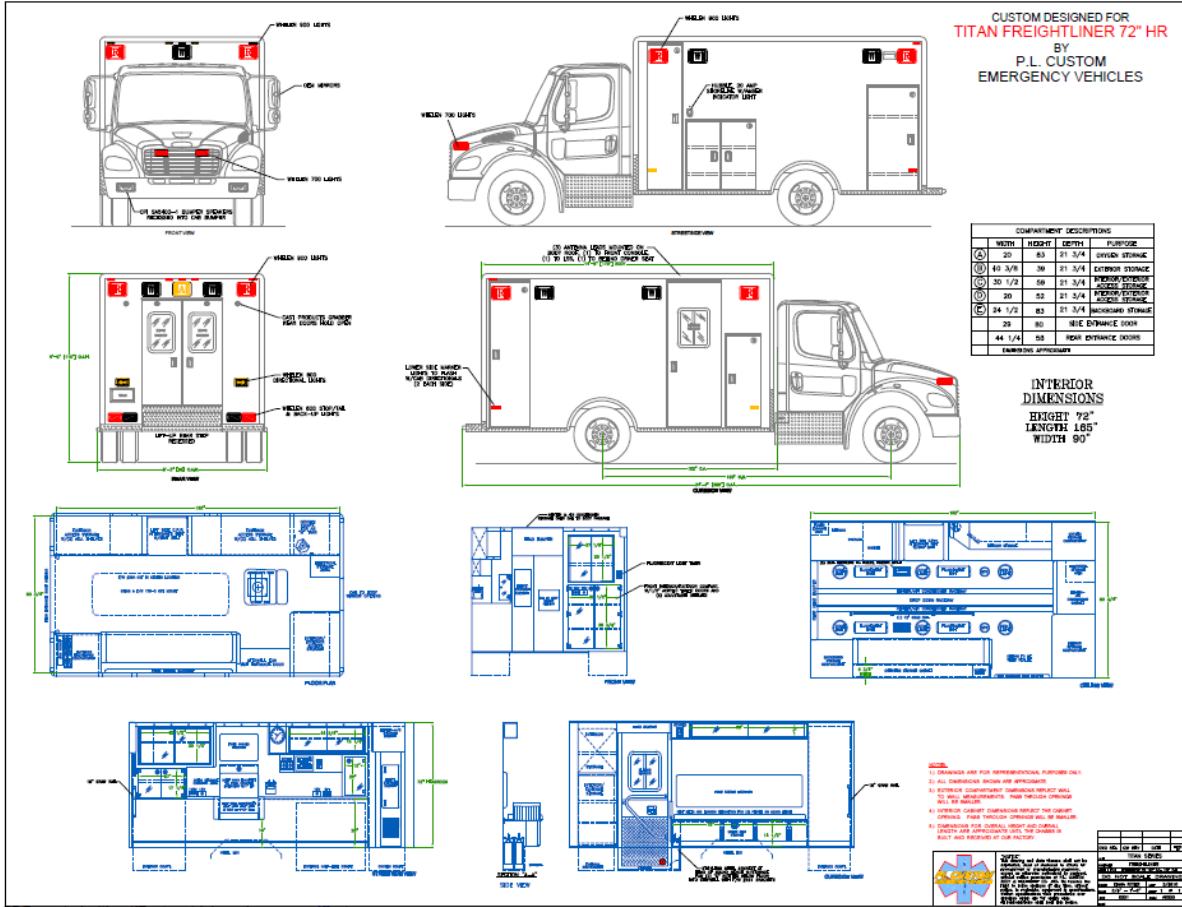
cad drawing of typical PL Custom medium duty ambulance
